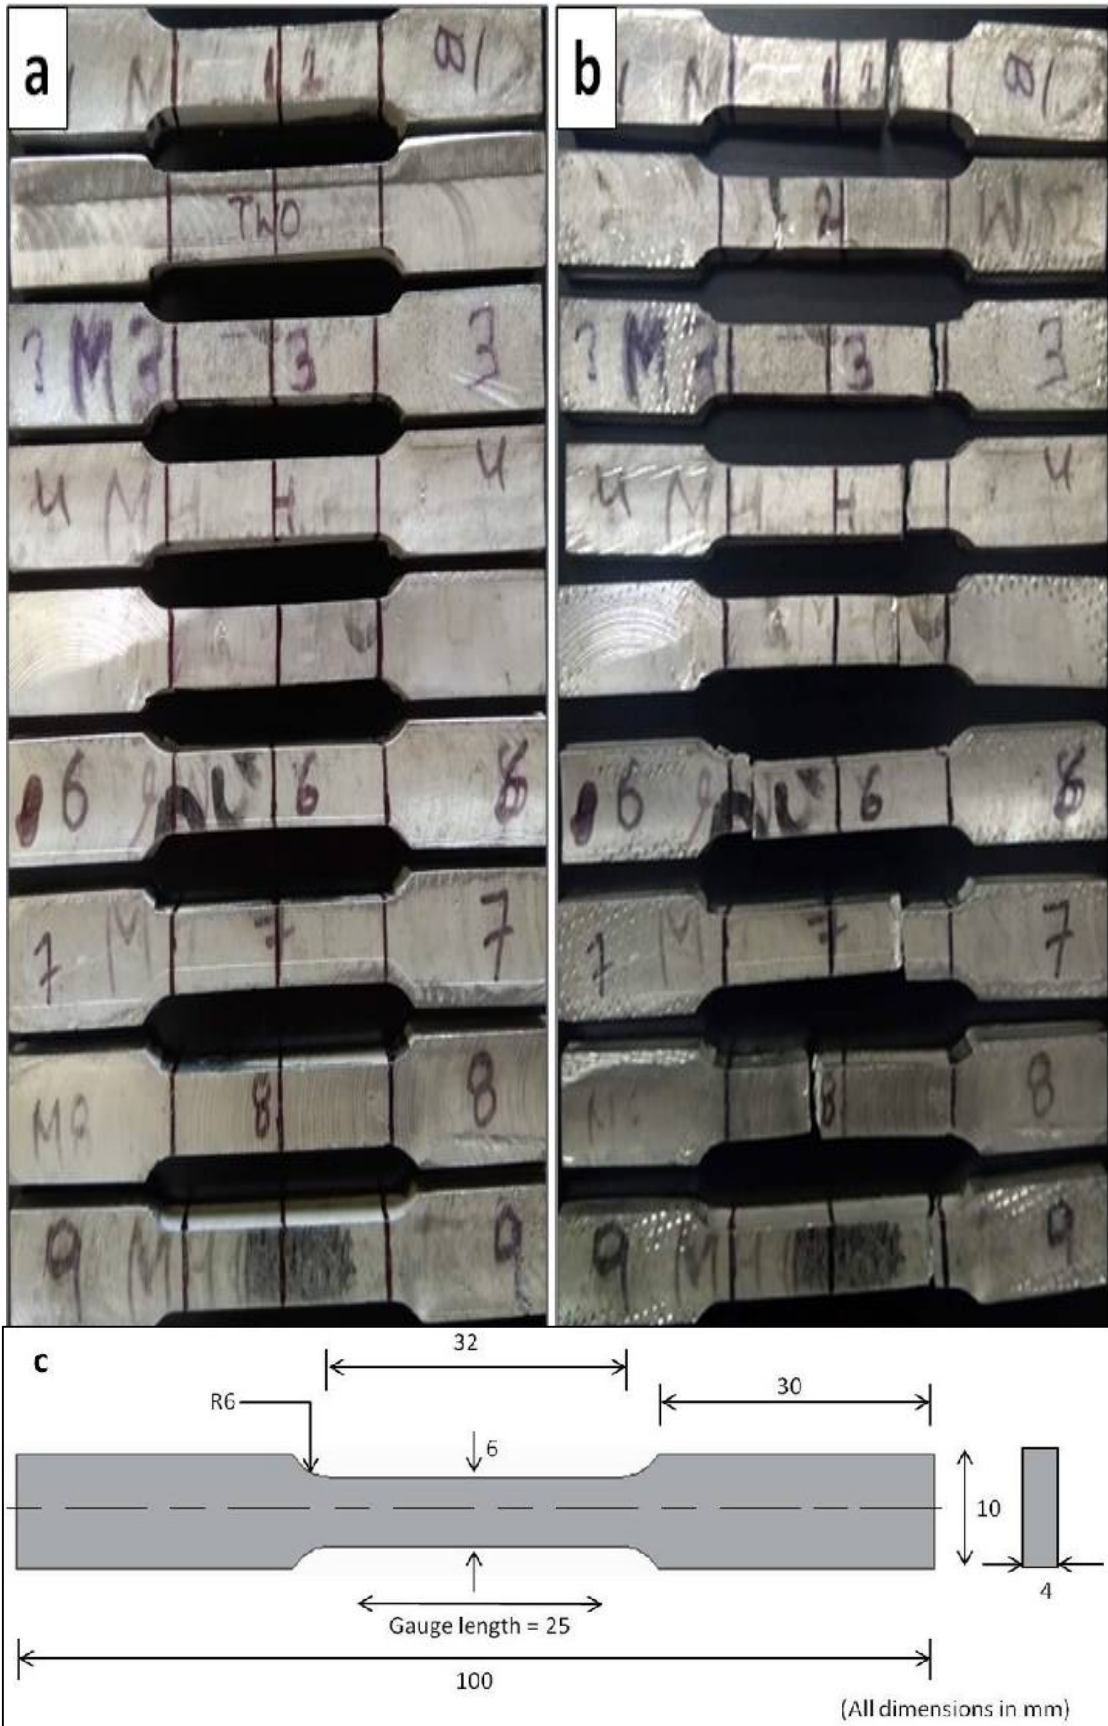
Tensile specimens (a) before fracture; (b) after fracture and (c) prepared as per ASTM B557M-06
